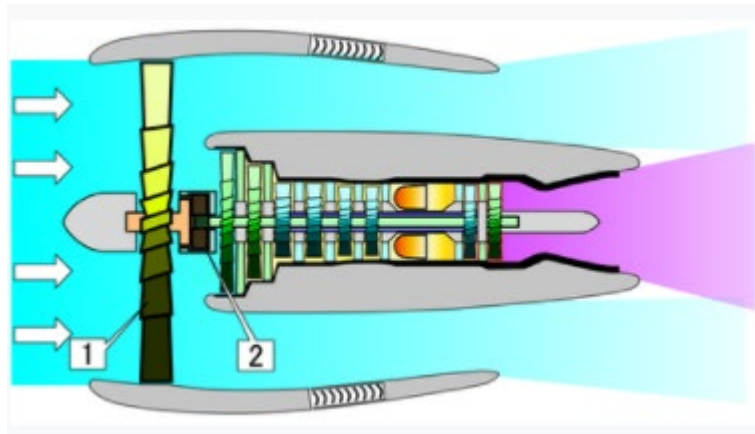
Typical design of the geared turbofan (1-fan, 2-gearbox)
